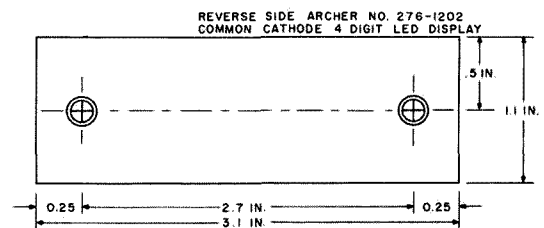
Glue two spacers, 3/16" diameter x 1/4", i.d. tapped for #4-40 screws, to the two places shown. These spacers must align with the 2 holes in the main board.
